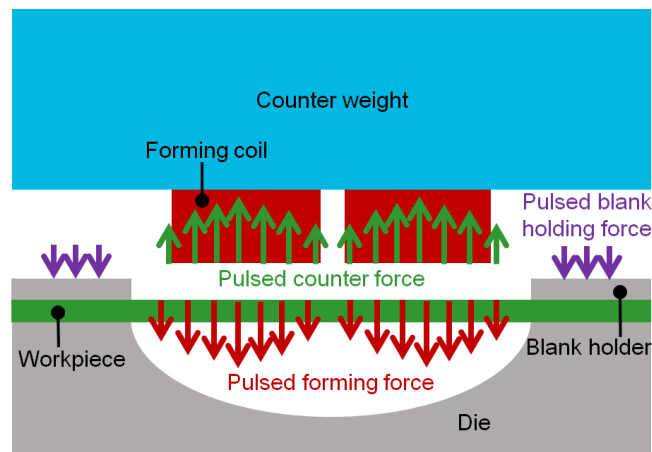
Schematic diagram of proposed EMF process for shaping large sheet metal parts
